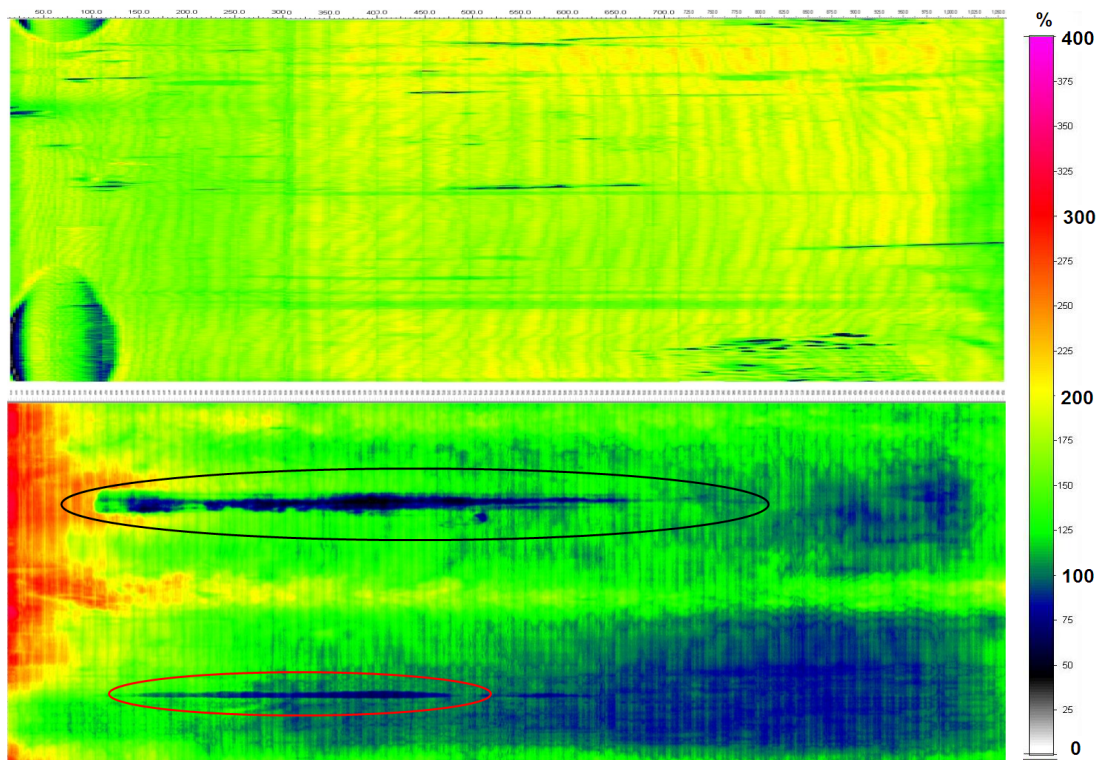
Manufacturing defects in copper tubes. The left image shows an axial scratch (T46) in an extruded tube and the right image shows a crack-like defect in a pierce-and-draw tube (T83).
